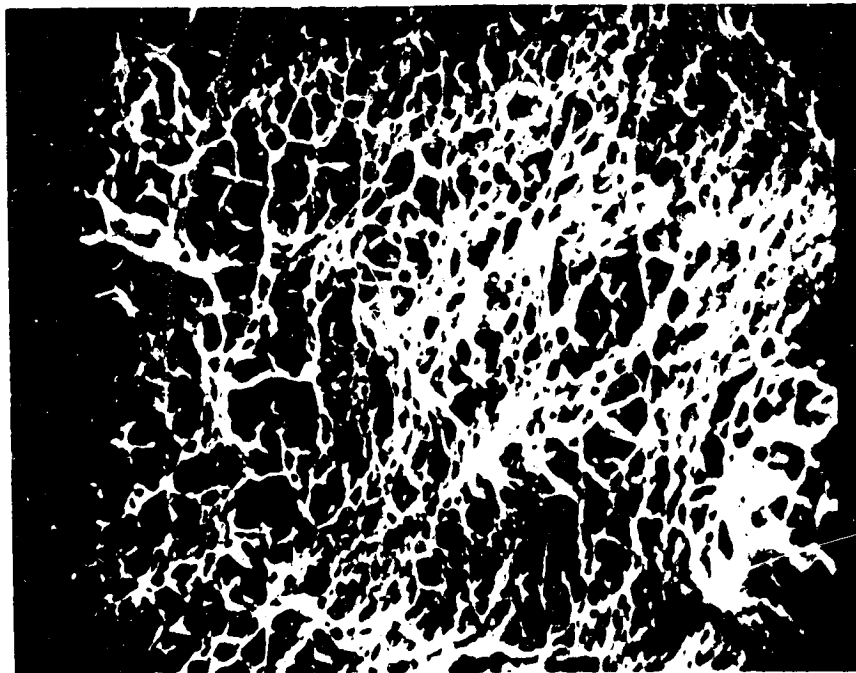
Fracture surface of aged Ti-8Al-1Mo-1V
